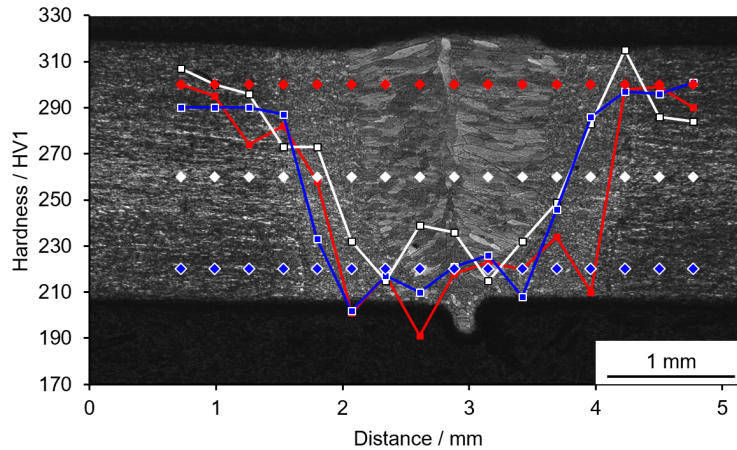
Hardness courses of a 2 mm TZM sheet EB welded with VACTZM filler metal. A hardness drop is observed in HAZ and FZ
